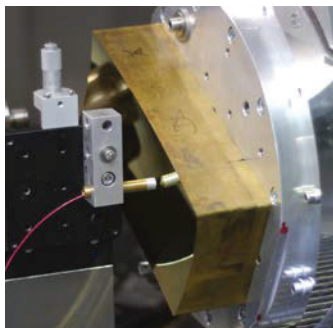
Optical measurement of on-axis machined mold insert for a HUD combiner.
